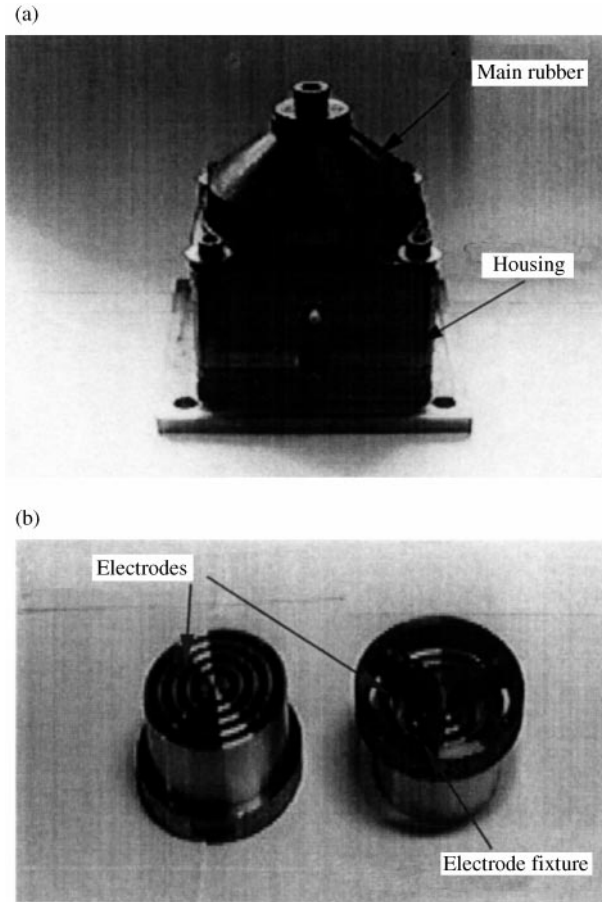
Photograph of the manufactured ER mount: (a) assembly; (b) electrode parts.
